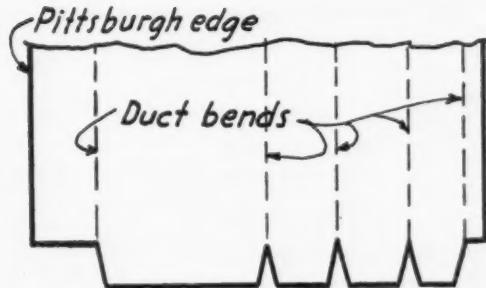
The old method of marking sheets for the brake required measuring, prick marking, notching each end where the bends are to come. Also juggling in the brake to line up the prick marks. Incidentally, trimming the ends of the sheets on the job often wastes the labor of notching, anyhow.
